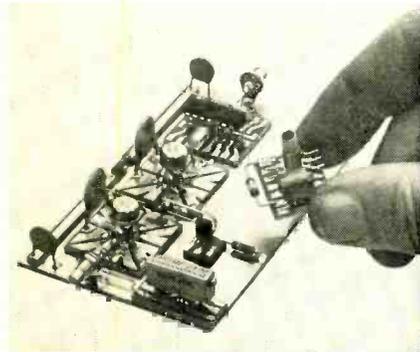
ASSEMBLING AN EXPERIMENTAL circuit using Mini-Mounts.
